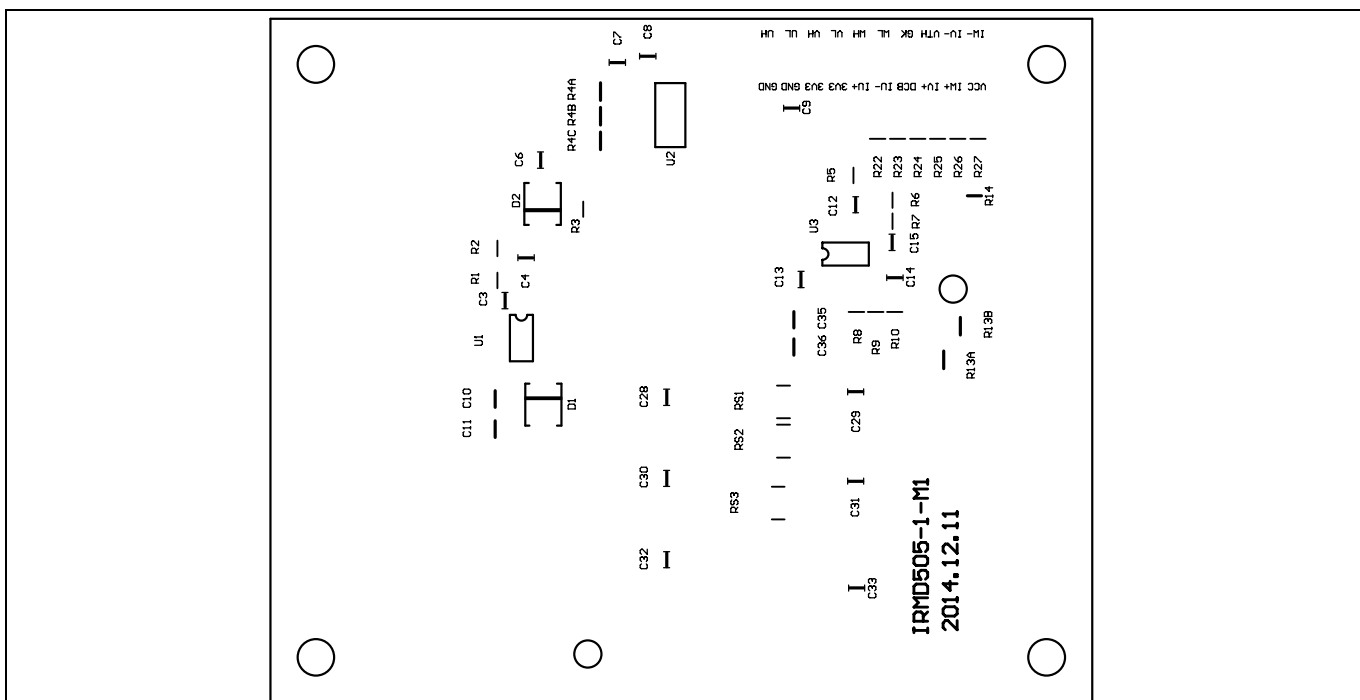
Bottom assembly print of the EVAL-M1-05-84D evaluation board
